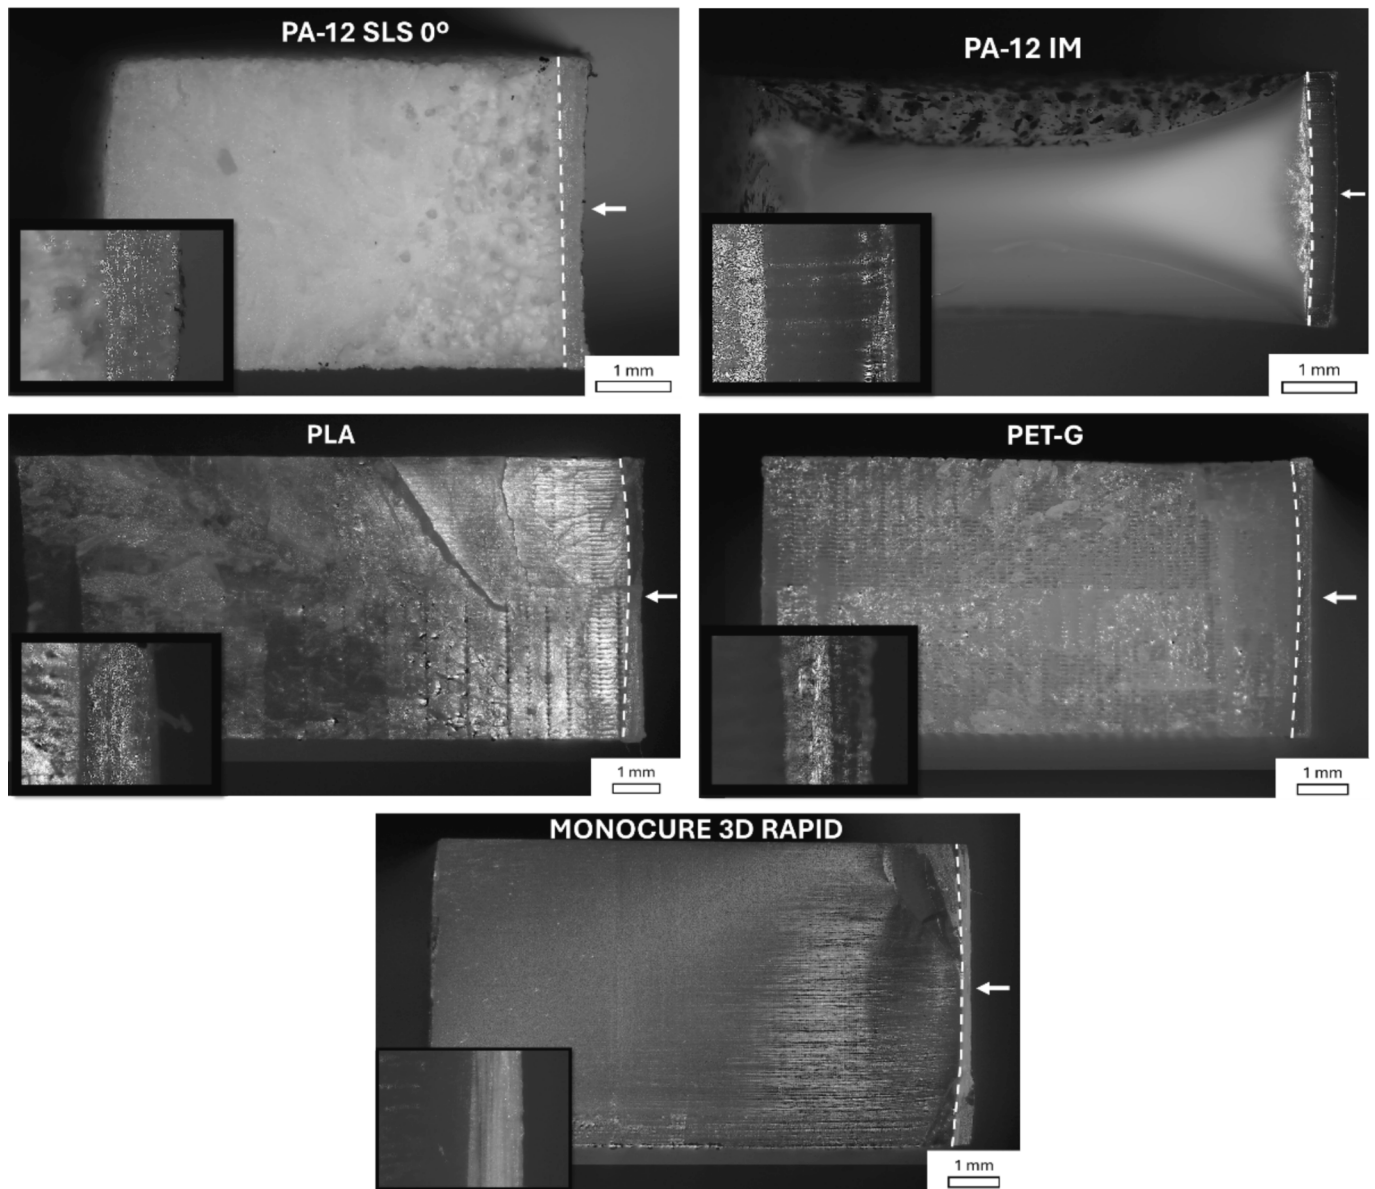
Fracture surfaces of cracked specimens with initial crack lengths between 0.2 and 0.4 mm in PA-12 SLS 0°, PA-12 IM, PET-G, PLA and MONOCURE 3D RAPID. The white arrow indicates the zone of introduction of the initial crack.
